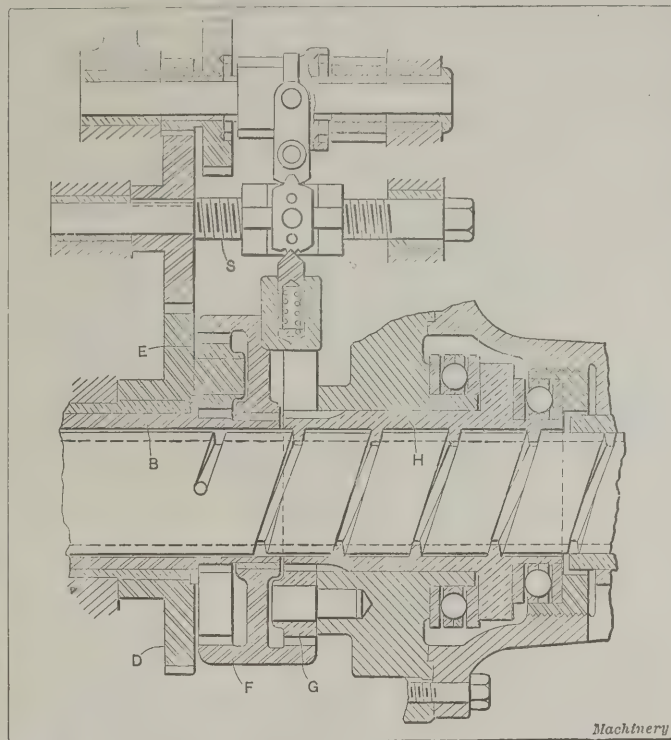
Differential Feed Mechanism and Automatic Limit Stops for Spindle of Machine shown in Fig. 2
